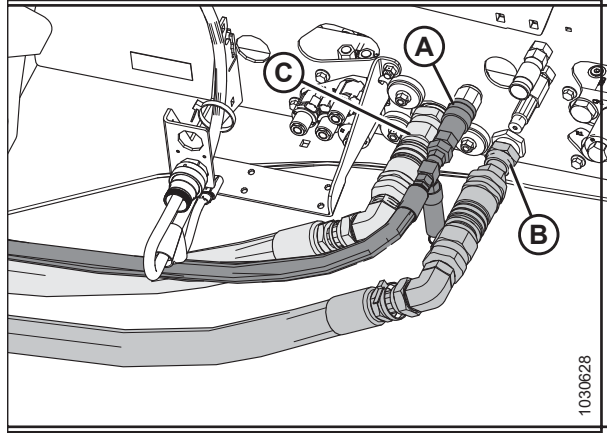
Header Drive Hydraulics – All M1 Configurations using Quick Couplers
